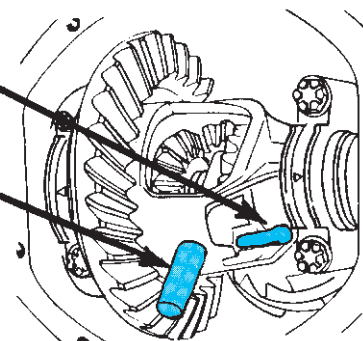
Removing the lock bolt allows removal of the differential pinion shaft. (Courtesy of Ford Motor Company)
